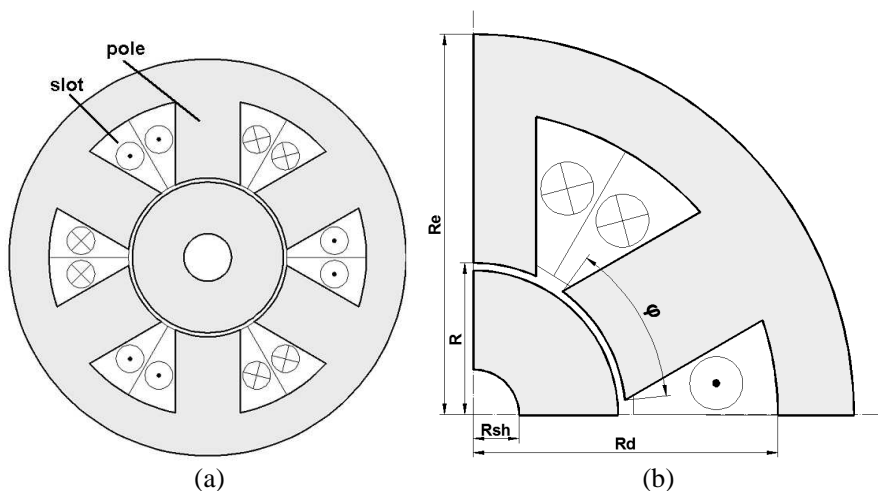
Longitudinal cross sectional view through of the MTFRM.
